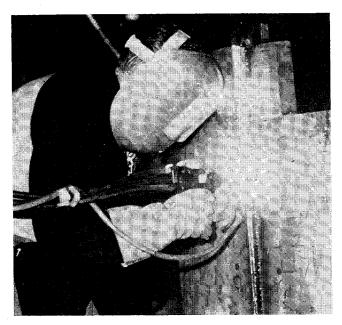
Welding titanium sub-assembly under shipyard conditions.
